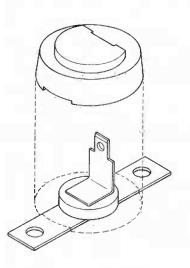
C: PICTORIAL VIEW OF POWER MOY PACKAGE
